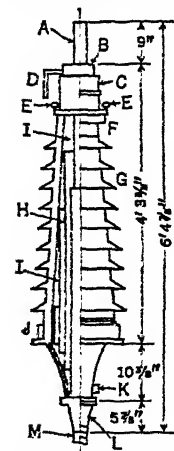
Oil-filled Bushing. A, line terminal; B, metal cap; C, oil gage; D, air breathing tube; E, lifting eye-bolts; F, top casting; G, porcelain shell; H, insulating barriers; I, oil space; J, bottom casting; K, oil drain; L, cable sleeve; M, cable.
